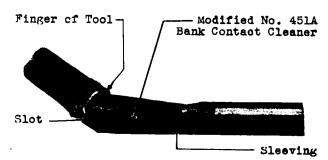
Position of Sleeving on Modified No. 451A Bank Contact Cleaner
